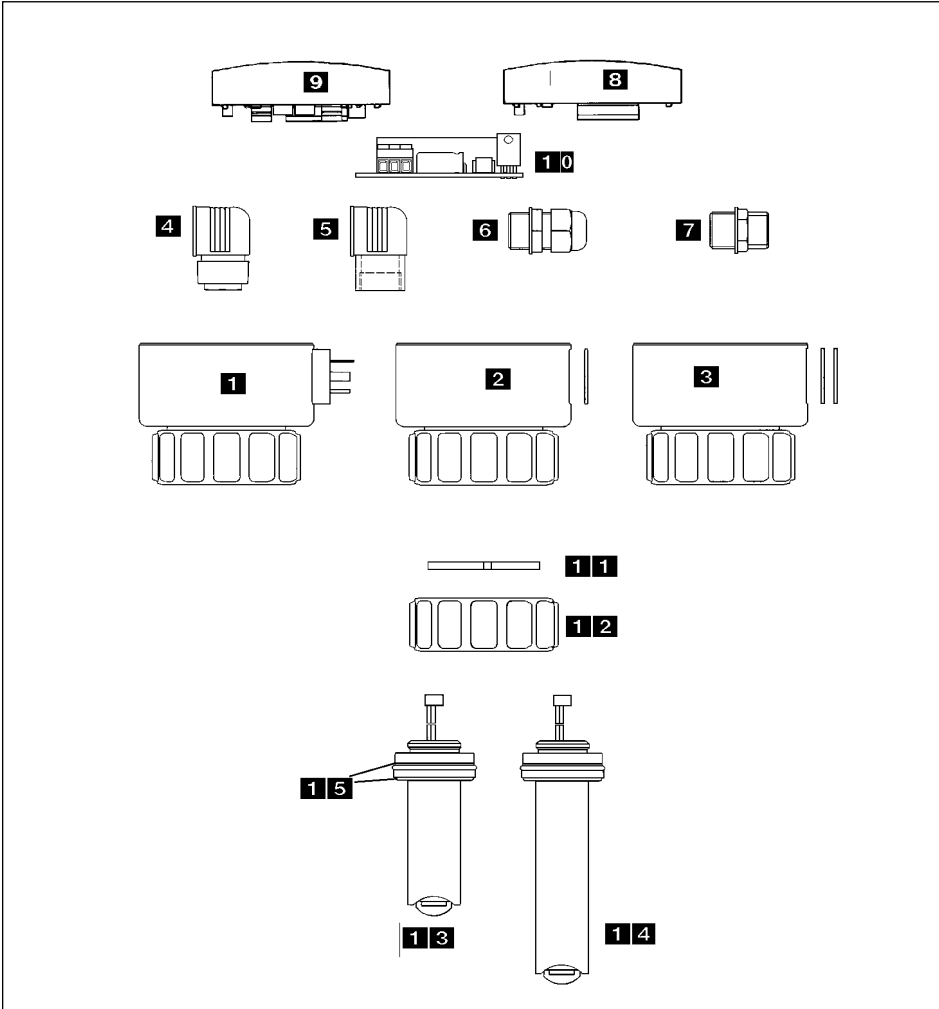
Spare Parts Explosion Drawing Compact Version
